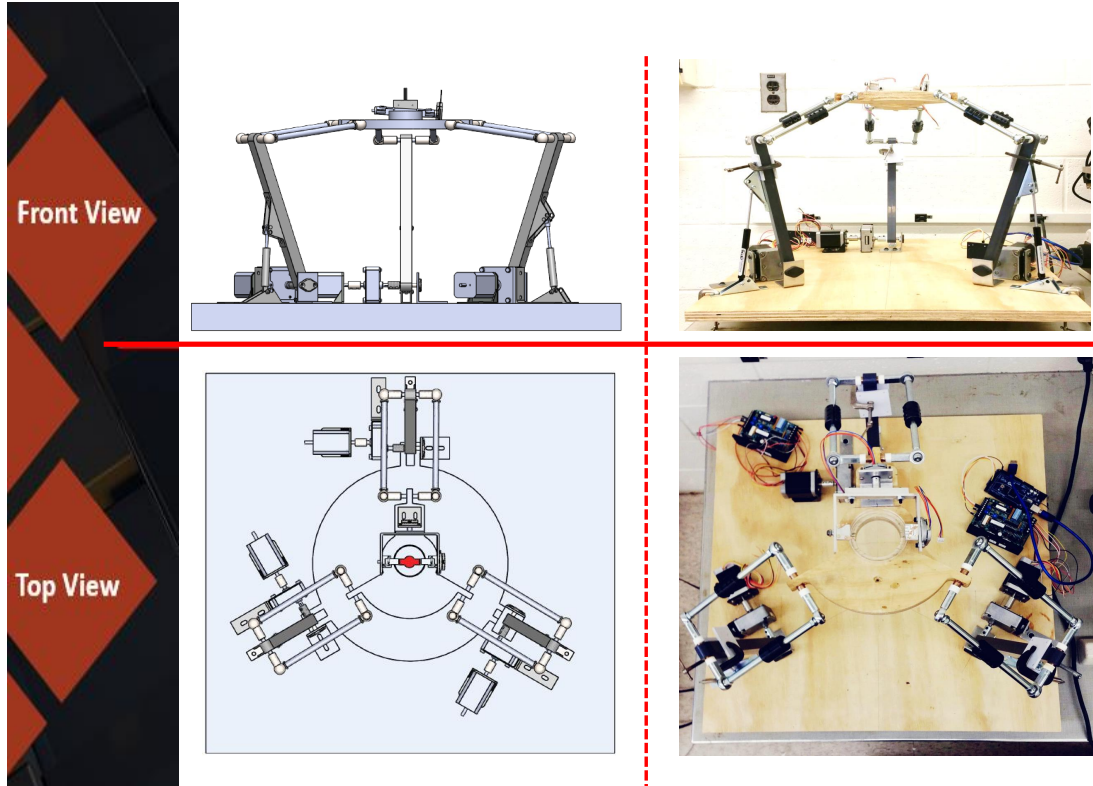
3-RSR Parallel Delta Manipulator: Parts Assembly and 2-DOF RR Serial  $\perp^{lr}$  axis Manipulator: Comparison between CAD assembly and Parts Assembly
